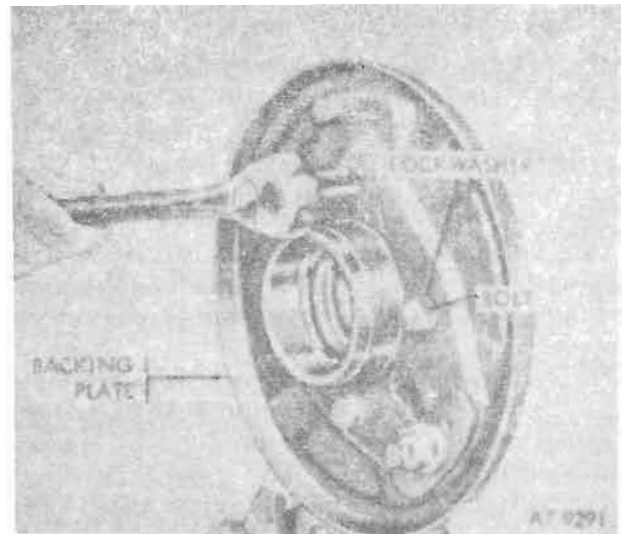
Brake backing plate retaining bolts and lockwashers.
